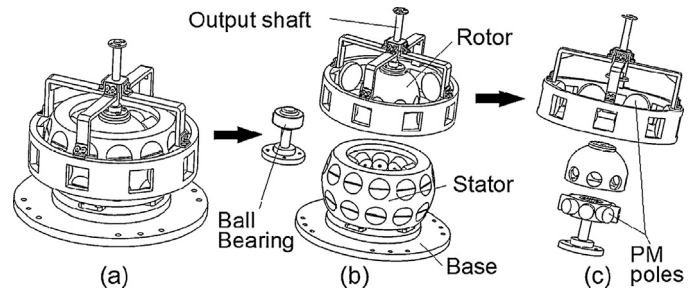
Schematic structure of the spherical actuator (a) Assembly view; (b) Exploded view of stator and rotor; (c) Rotor poles distribution.
